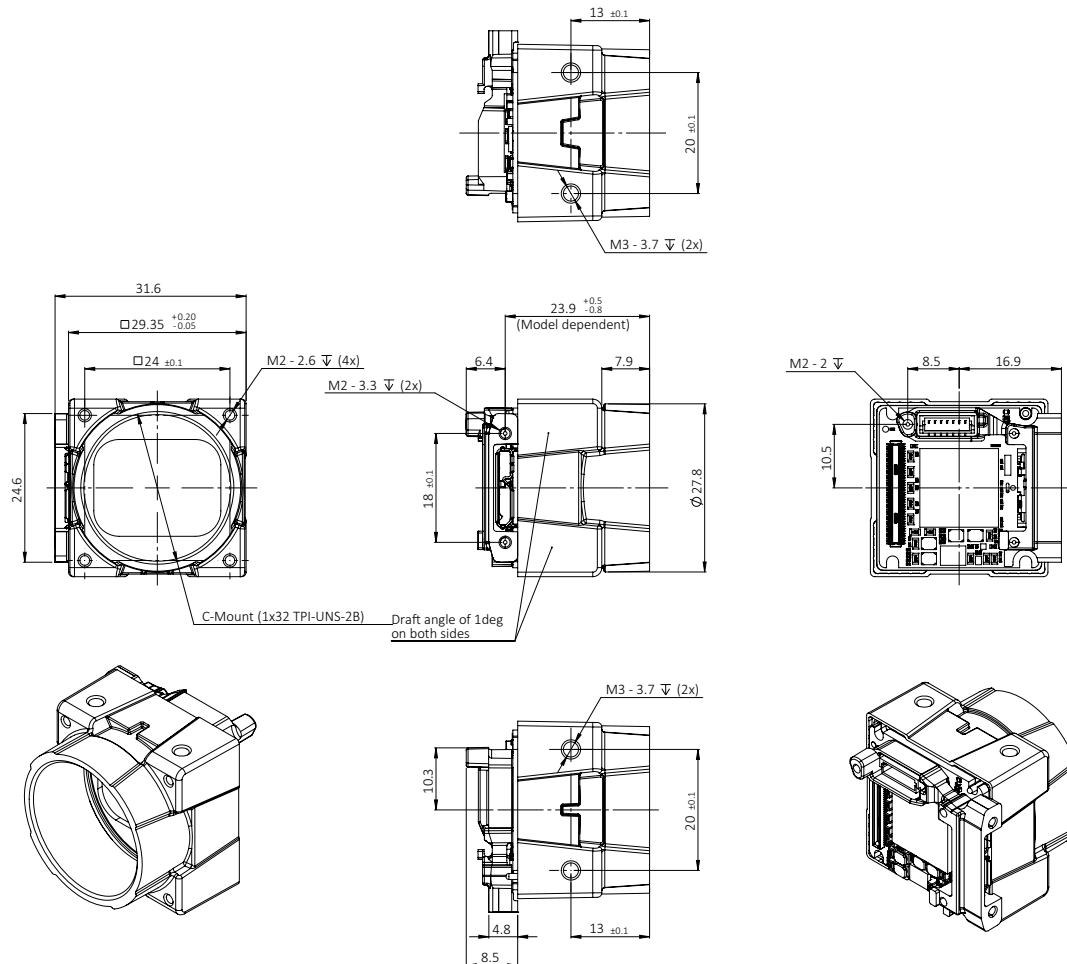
Open Housing C-Mount 90° (standard Alvium) dimensions
